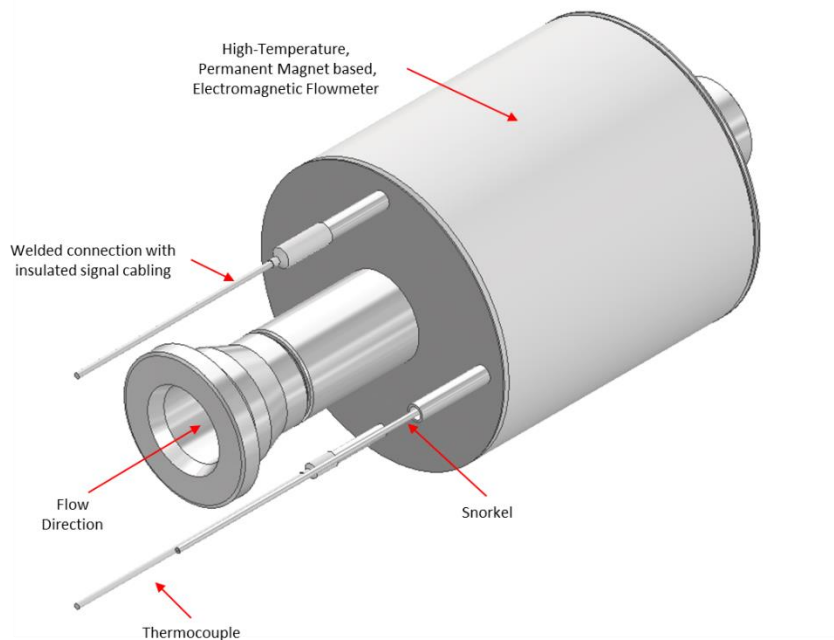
Updated flowmeter design that includes an 1/8-inch snorkel tube. This tube will be routed through the test section flange and allow the internal flowmeter environment to be controlled during testing.
